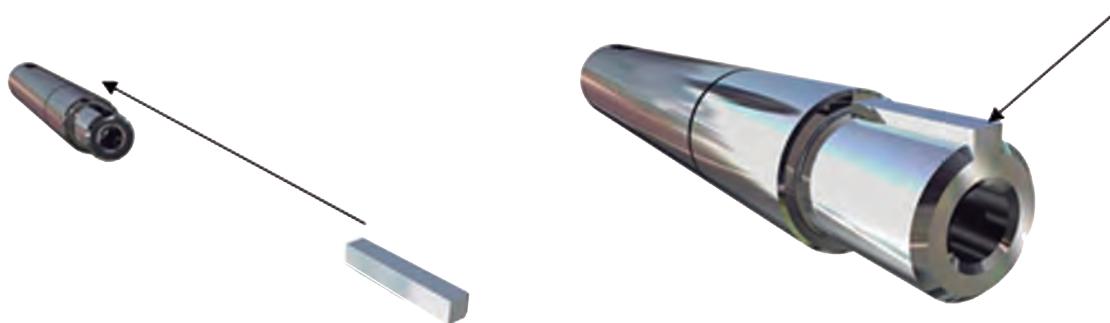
Inserting the shaft key in the keyway on the impeller side of the shaft.
